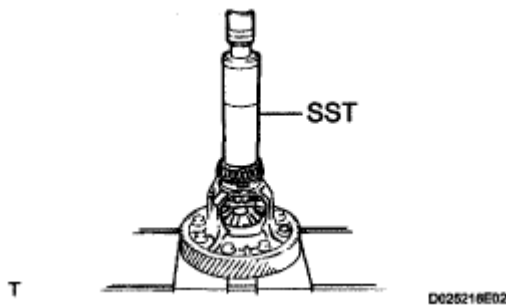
Installing Front Differential Case Front Tapered Roller Bearing To Differential Case
